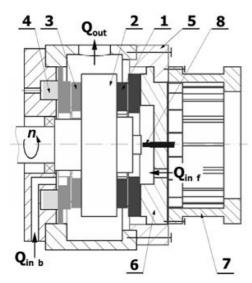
Cross section of the bearing test rig: 1-front bearing, 2-collar, 3-back bearing, 4-load piston, 5-bearing housing, 6-plate, 7-torque meter, 8-distance sensor [23]. Reproduced with permission from Ref. [23], © The authors, 2018.
